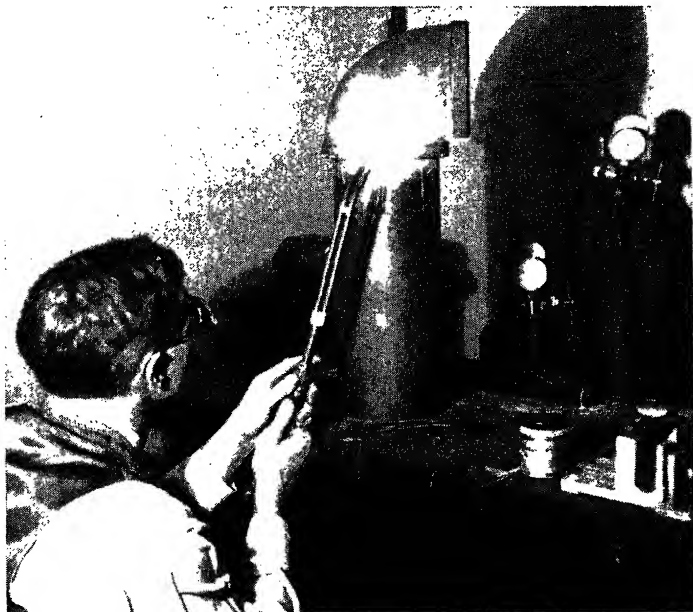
Large two-flame torch for silver brazing large flange assembly.
